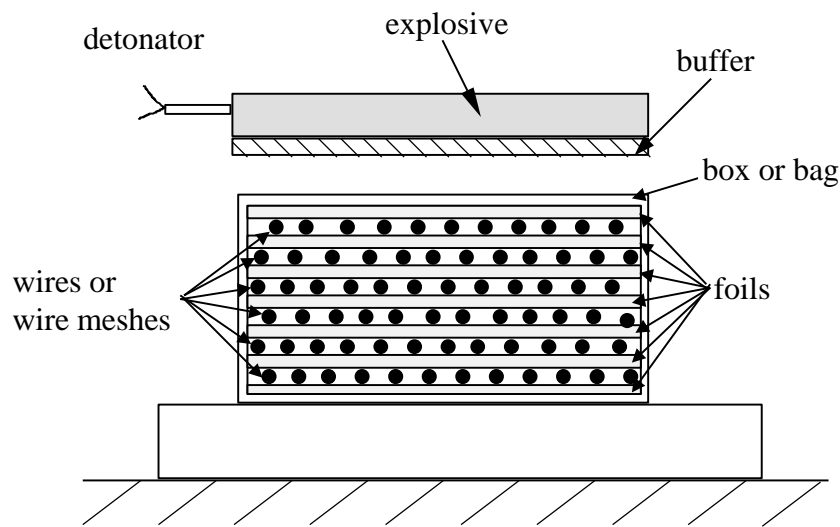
Geometries for explosive welding foils to wires or wire meshes<sup>(125)</sup>
